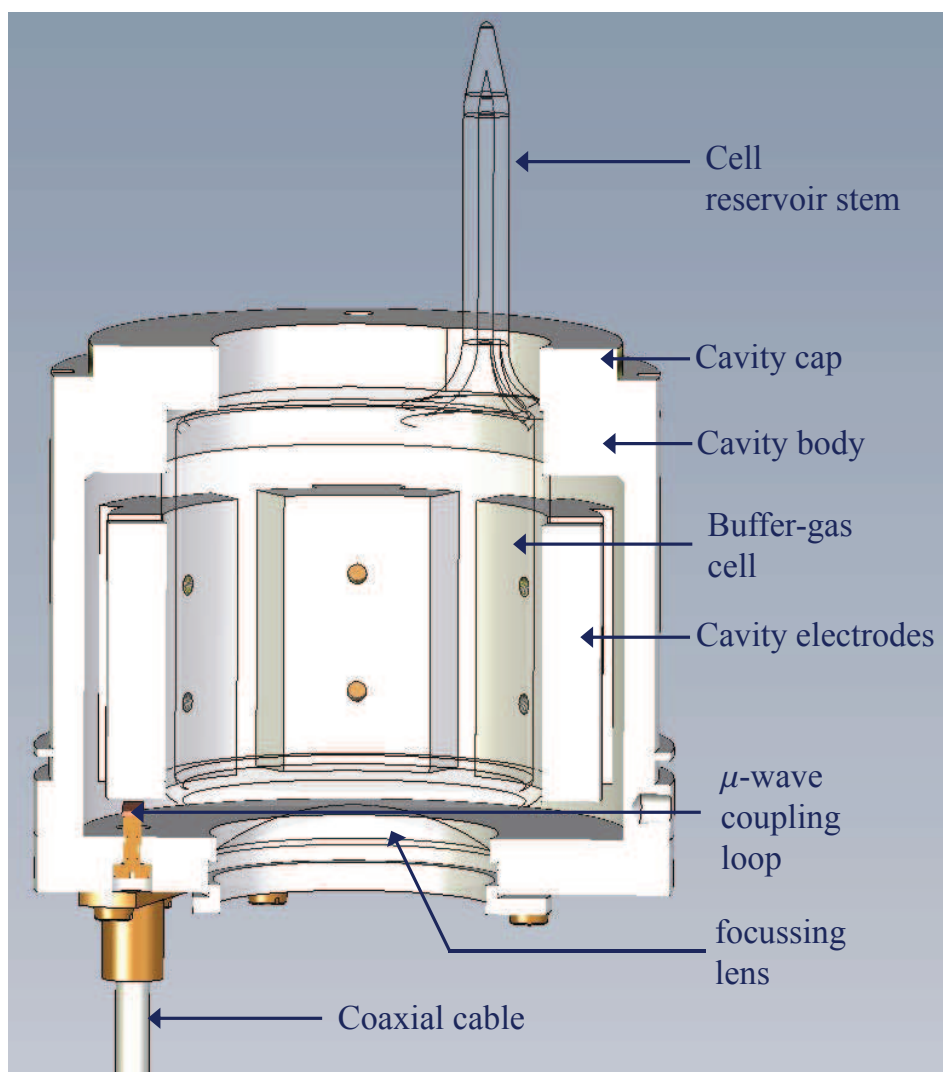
CAD diagram of the newly designed enlarged magnetron type cavity with six electrodes, capable of holding the 25 mm diameter vapor cell.
